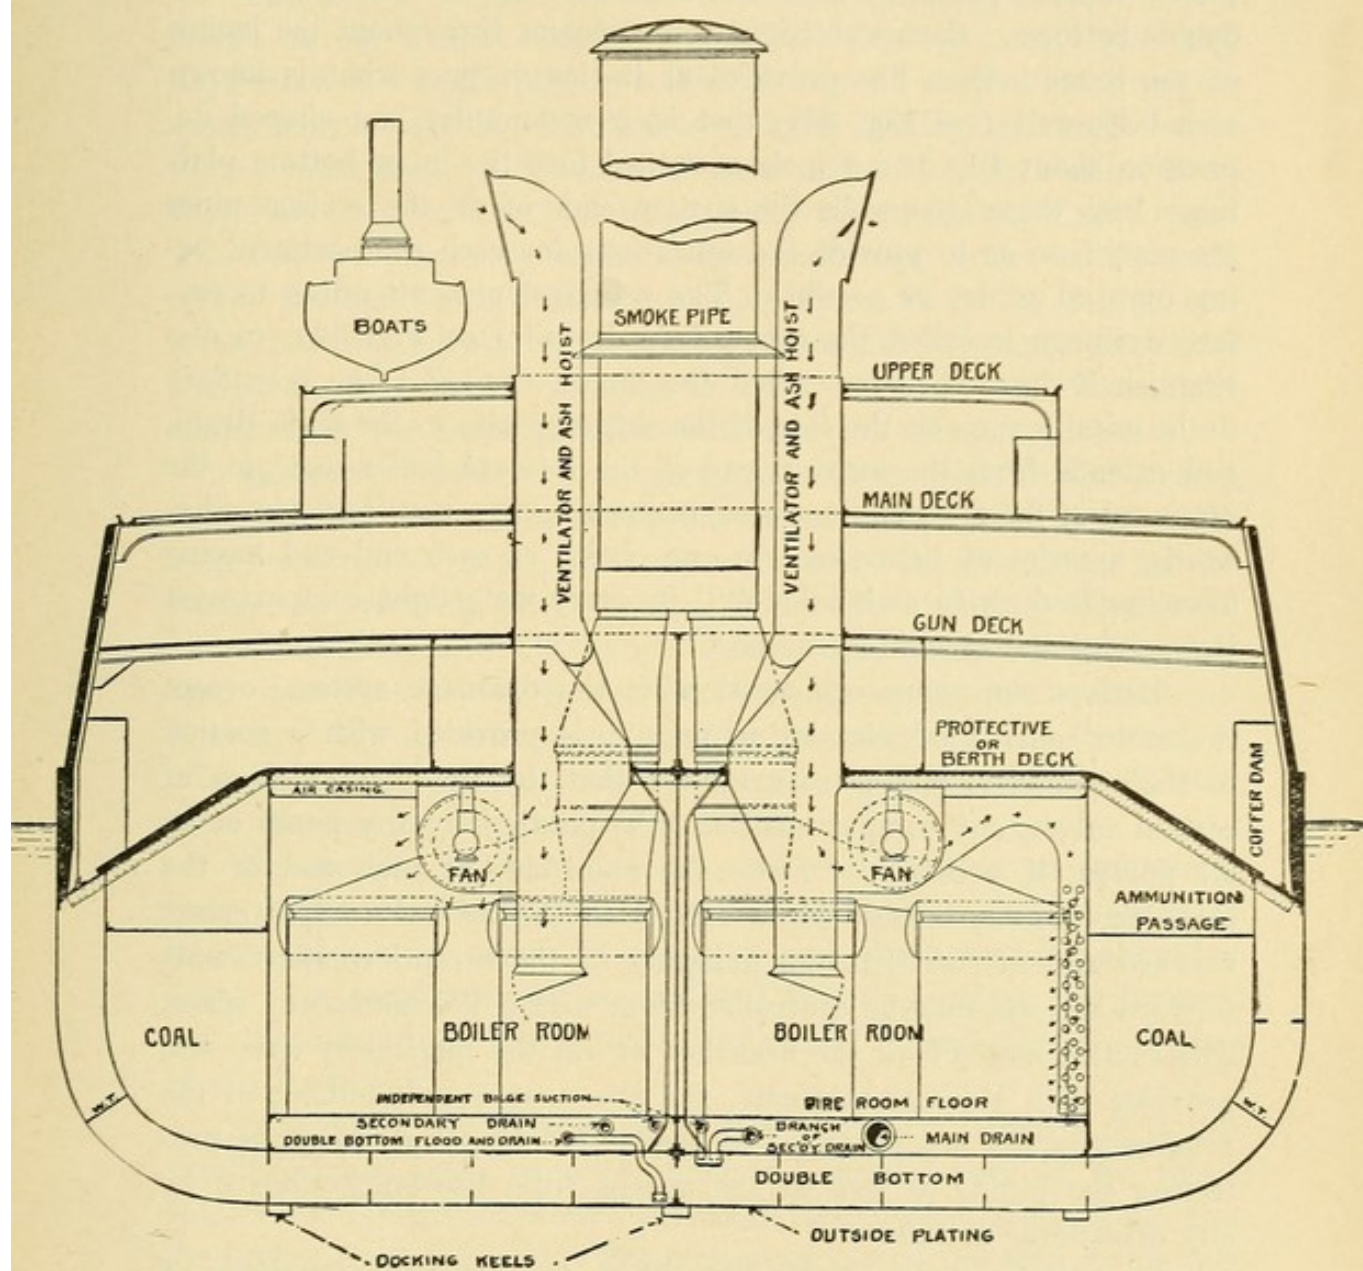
Cross-section of Ship, Showing Arrangement of Drainage System.
